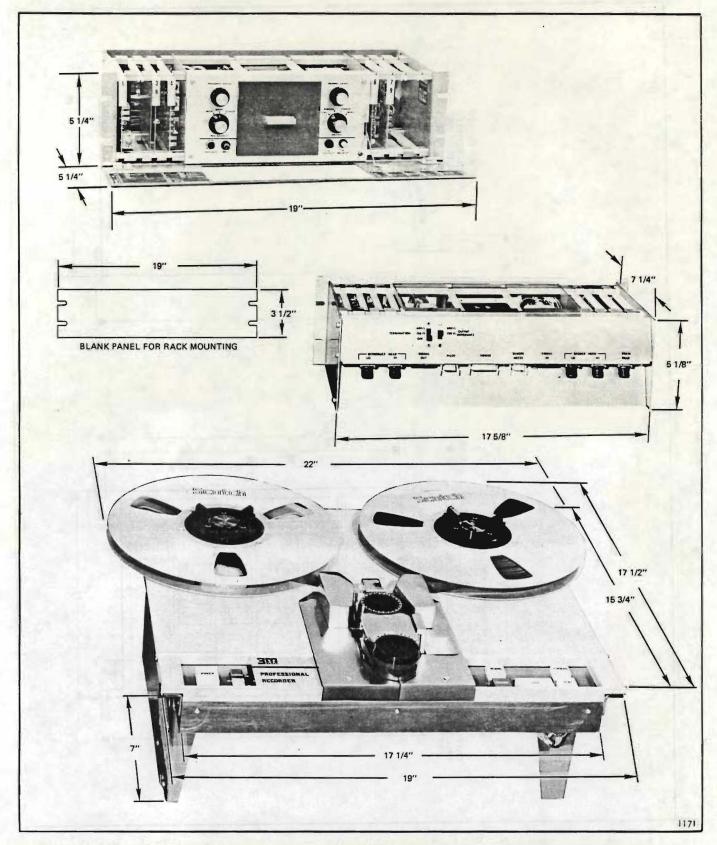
Outline Dimensions for Rack Mounting and Custom Installations
